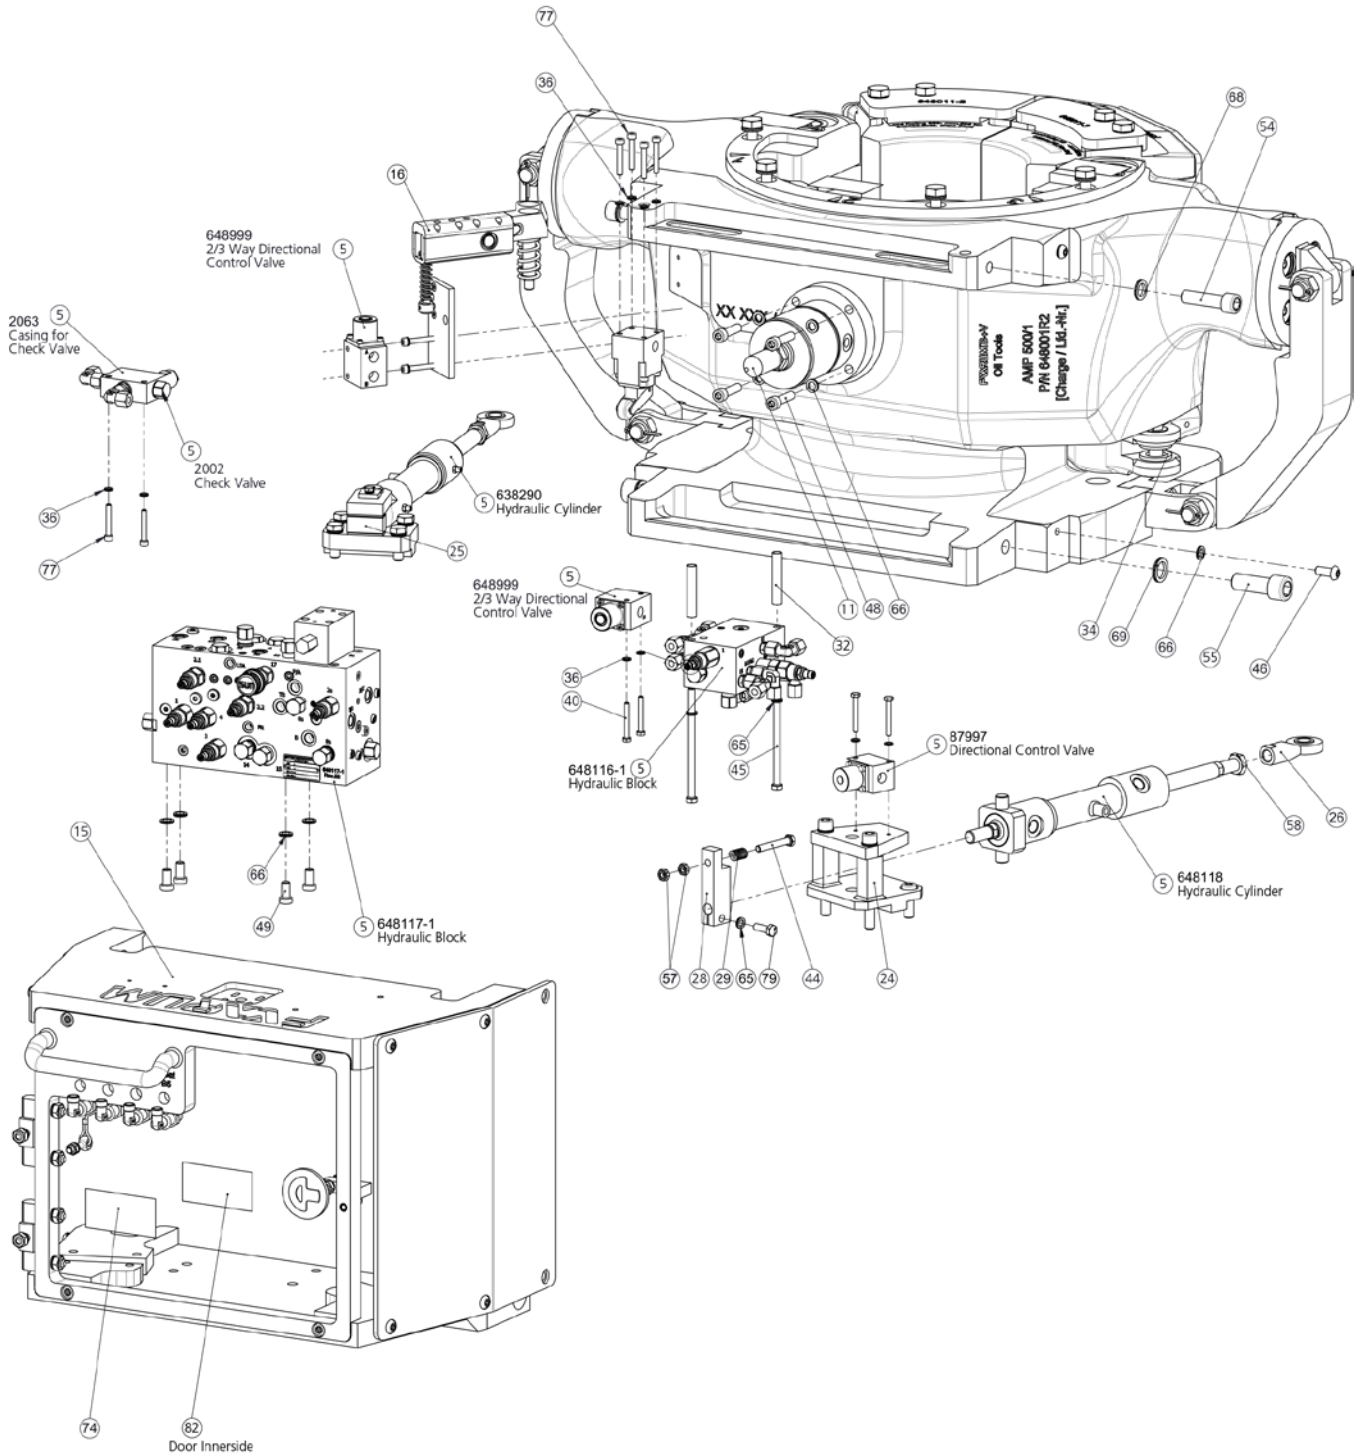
648100-Y AMP®-500/1 Drawing II
